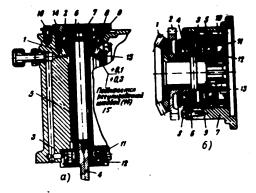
Accessory Drive Shaft and Bevel Gear Drive
